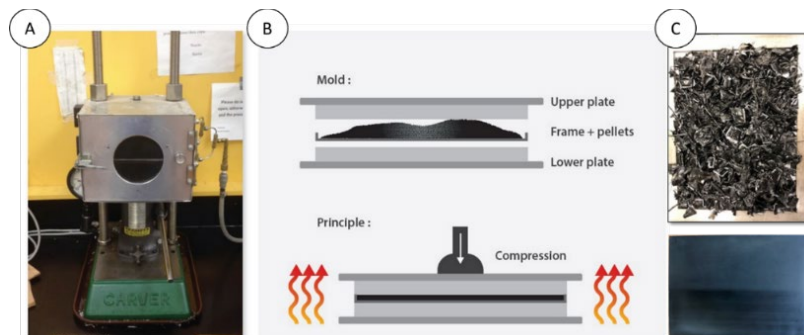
Plate molding: a) Carver hot press, b) mold and molding principle, c) frame containing composite pellets and molded plates.
